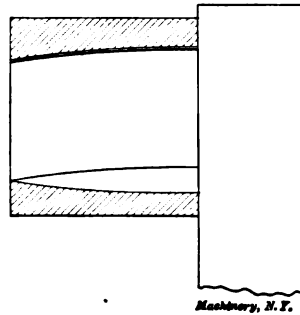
Section Showing the Bending of a Crank-pin and Consequent Unequal Wear of the Box.
